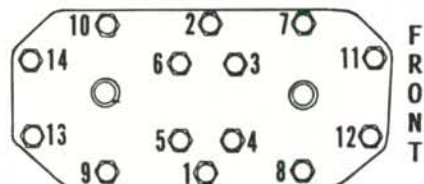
Tighten cylinder head nuts in sequence shown. Refer to text for tightening torque specifications.
